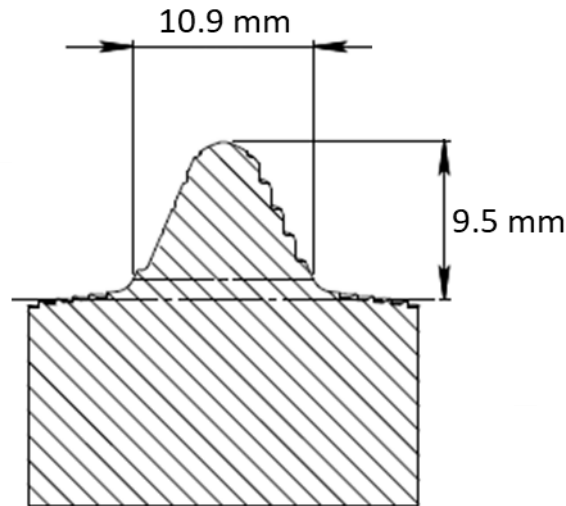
Cross-section of PCBN-W-Re tool's probe geometry
